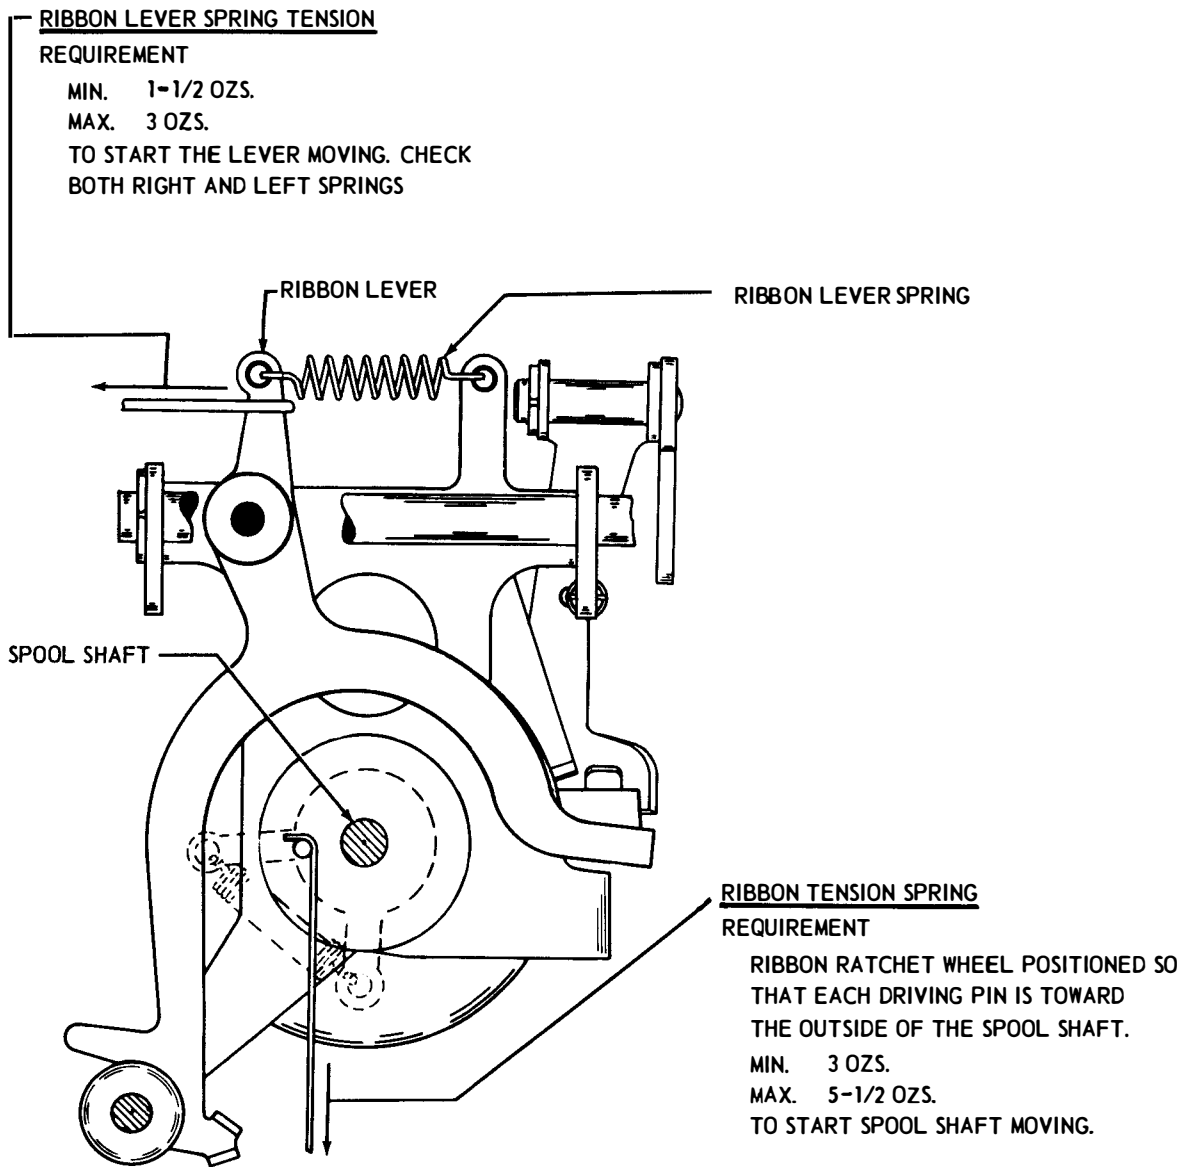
Automatic Typewriter, Ribbon Reverse Mechanism, Top View
